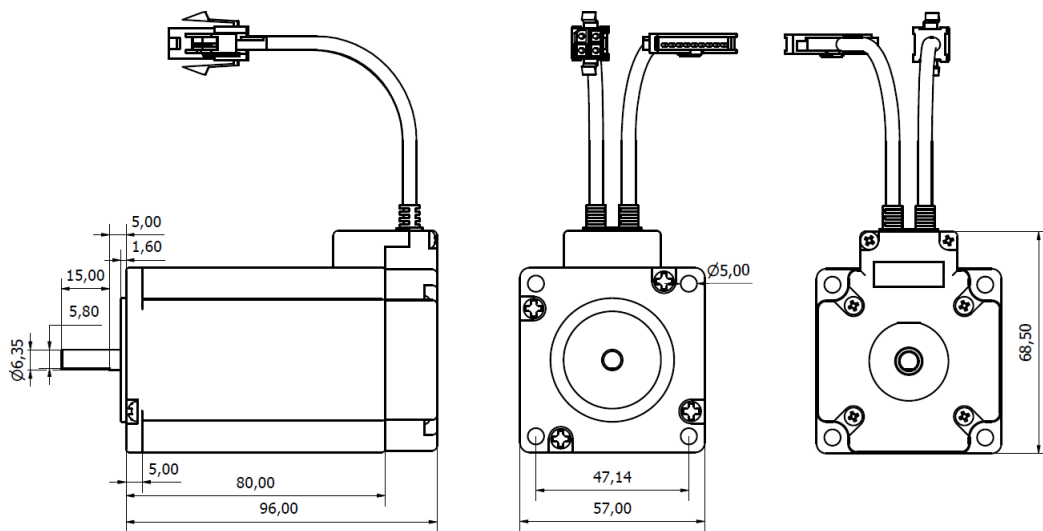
The dimensions of EzM2-56L-A stepper motor.
